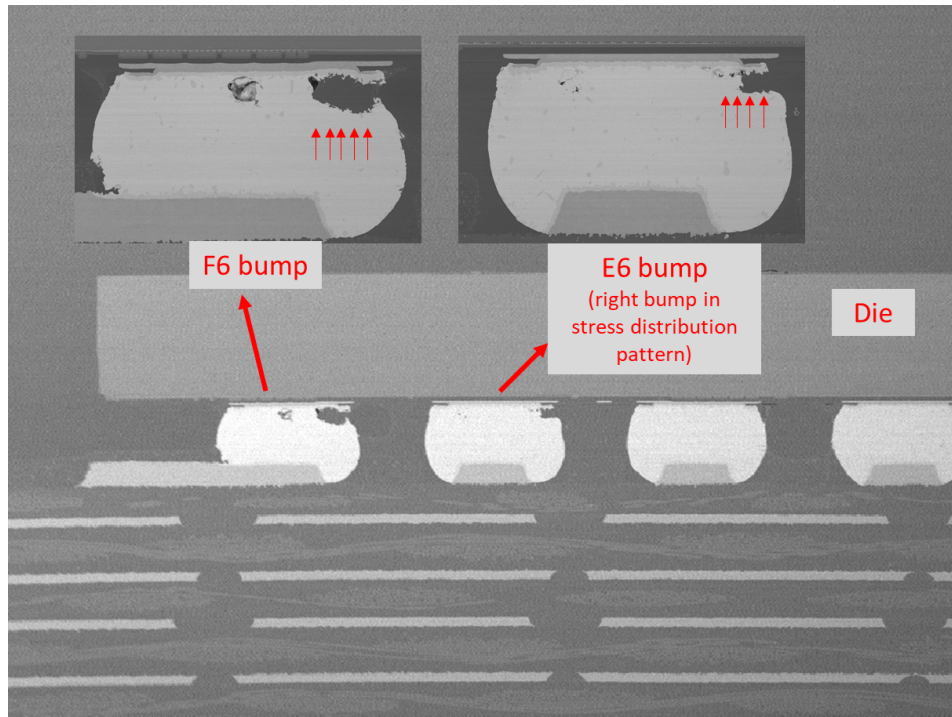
Cross-section of PCB 2, which shows partial failure with the bump failed in PCB1
